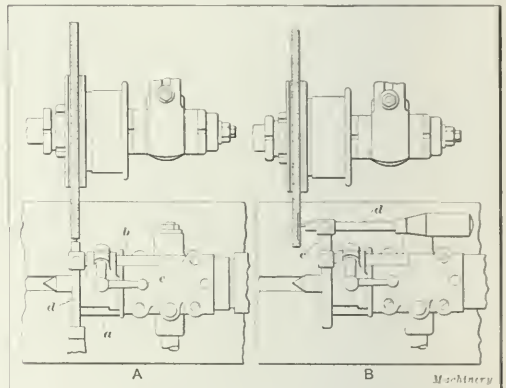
Common Method of truing Face and Sides of Grinding Wheel
